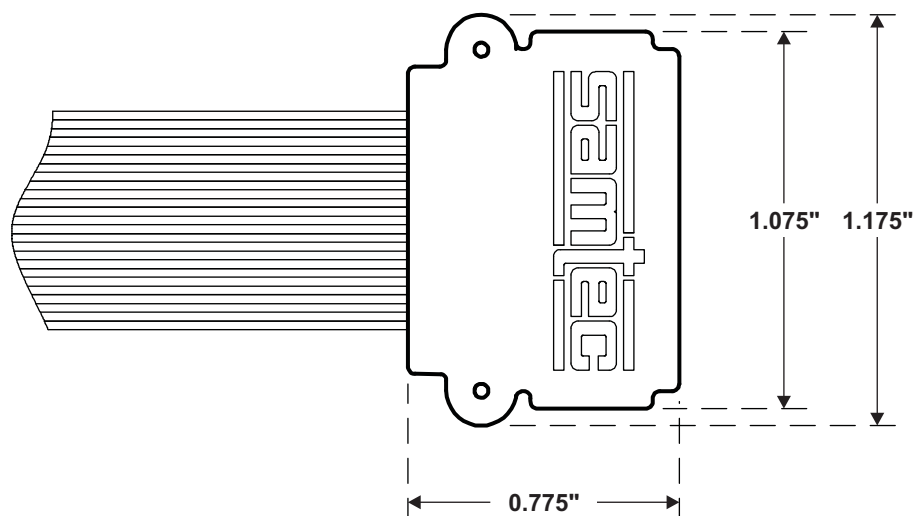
XDS560 v2 System Trace MIPI 60-Pin Target Cable Header Dimensions
